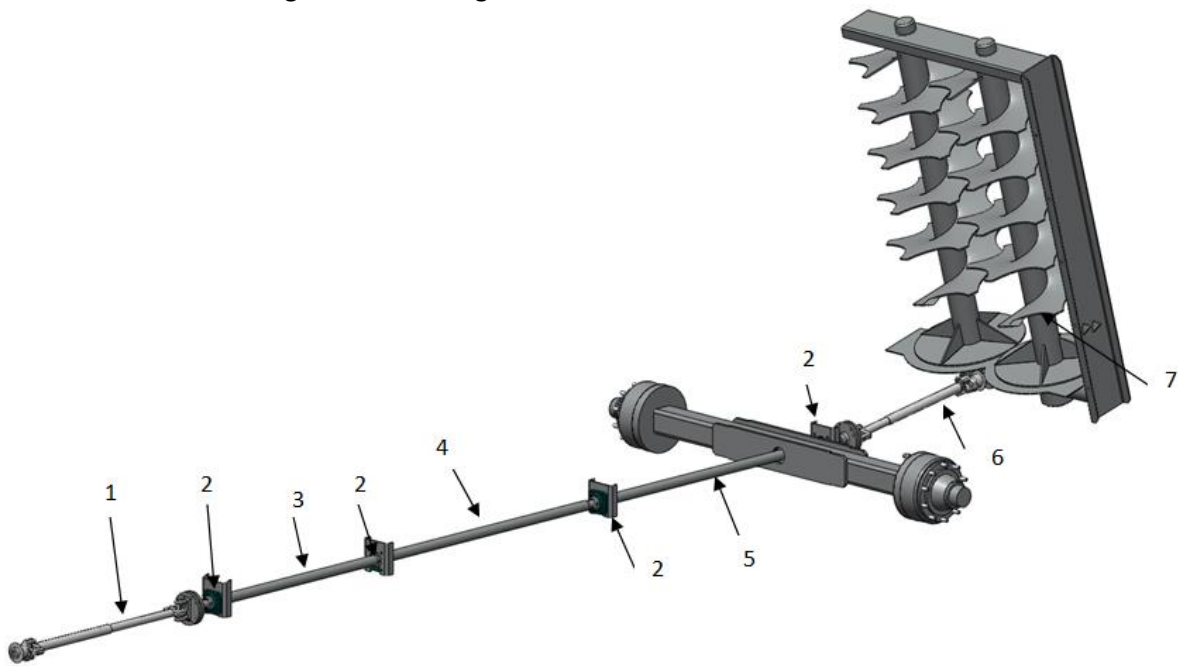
Drive transmission diagram: 1 - PTO shaft with connection to the tractor; 2 -shaft bearing; 3 - transmission shaft; 4 - transmission shaft; 5 - transmission shaft; 6 - PTO shaft; 7 -manure spreader.
